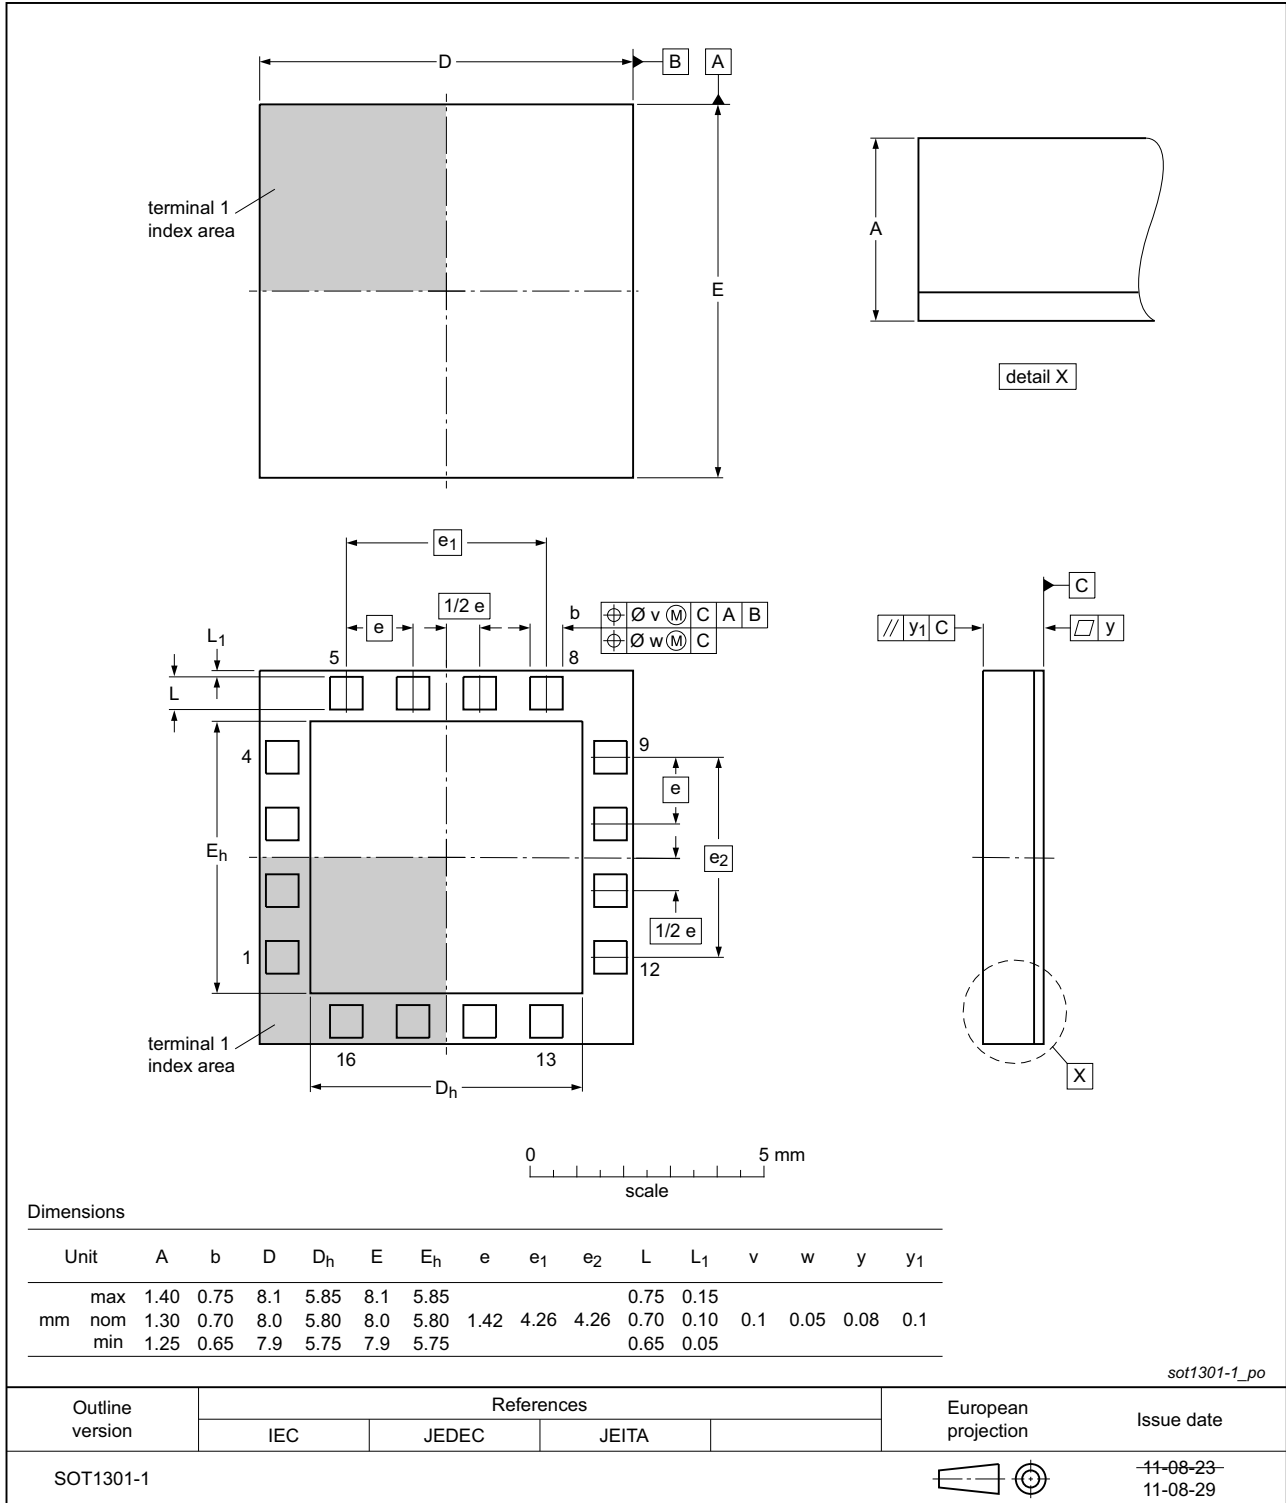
Package outline SOT1301-1 (HLQFN16R)
